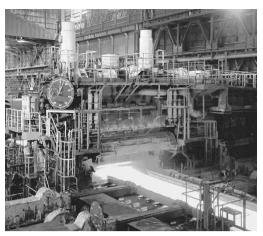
Finishing mill for steel plate at Kakogawa Works
